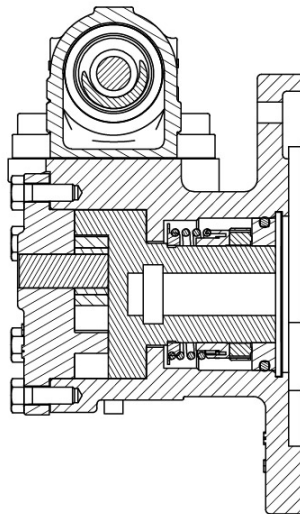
VV75G & VV75GG Mechanical Seal Installation
